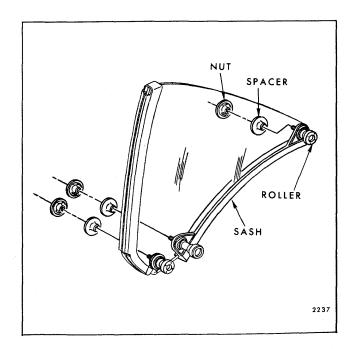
Rear Quarter Window Assembly - "E" Body Styles
